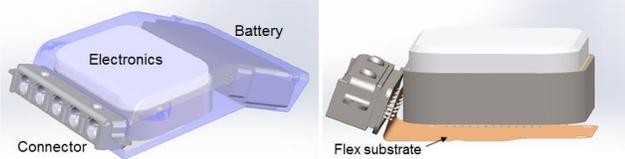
Illustration of the Major Packaging Components Comprising the Central Hub
